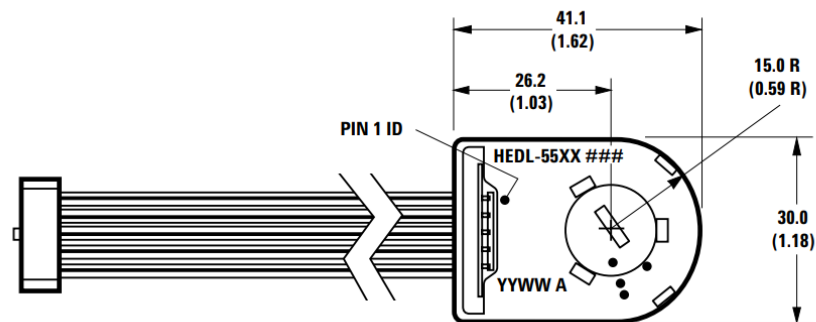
Physical dimensions of the incremental encoder used for the system [33]
